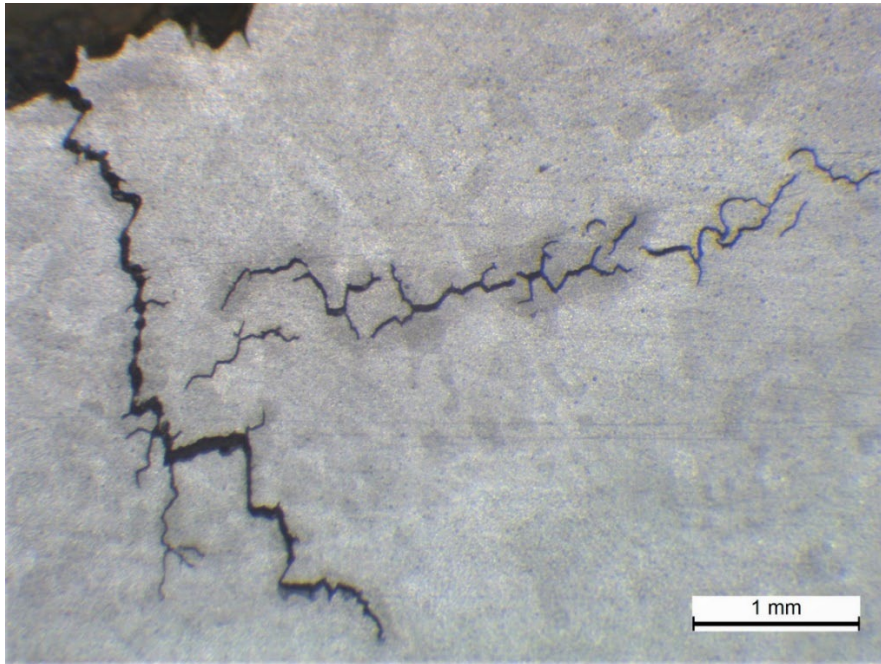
Typical appearance of hydrogen induced cracks in weld metal. The main indicators are changes in crack direction and also branching of the smaller cracks.
